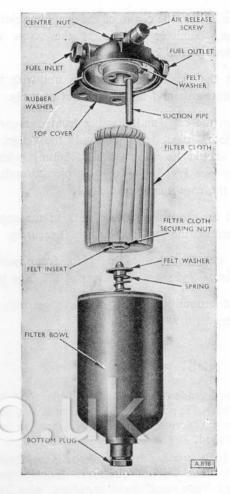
Exploded view of main fuel filter (C.A.V.)
